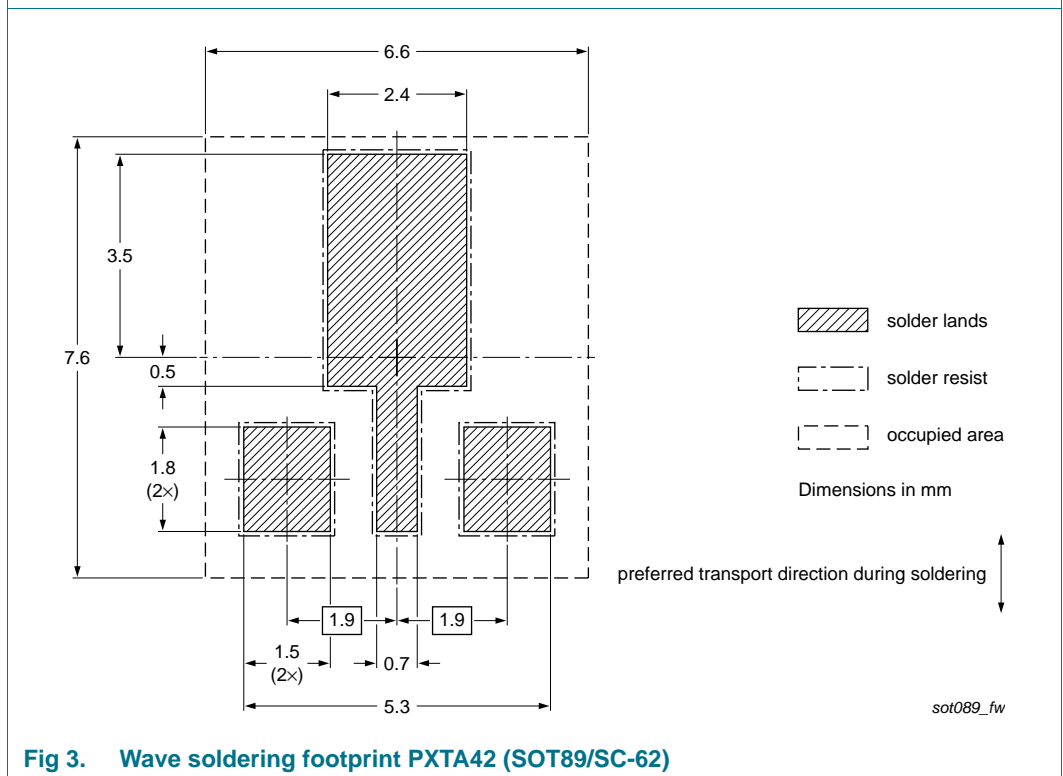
Wave soldering footprint PXTA42 (SOT89/SC-62)
